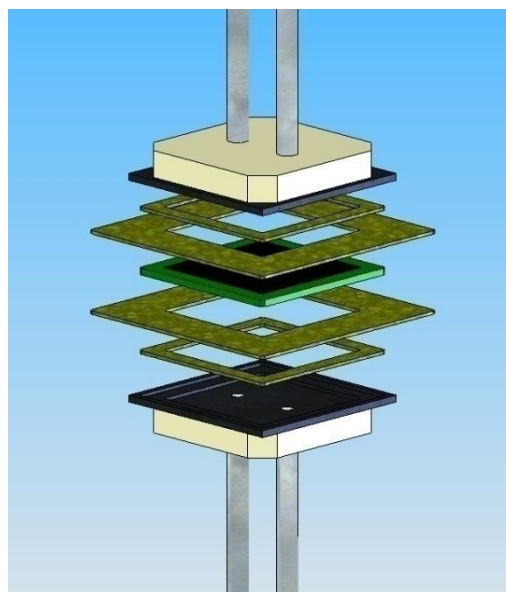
Exploded view of the cell setup with mica gaskets
